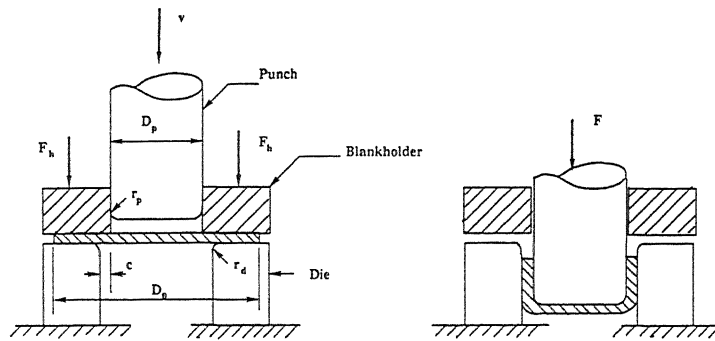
Drawing of a cup-shaped part: Symbols c = clearance, D_0 = blank diameter, D_p = punch diameter, r_d = die arc radius, r_p = punch corner radius, F = drawing force, F_h = blank-holding force.
